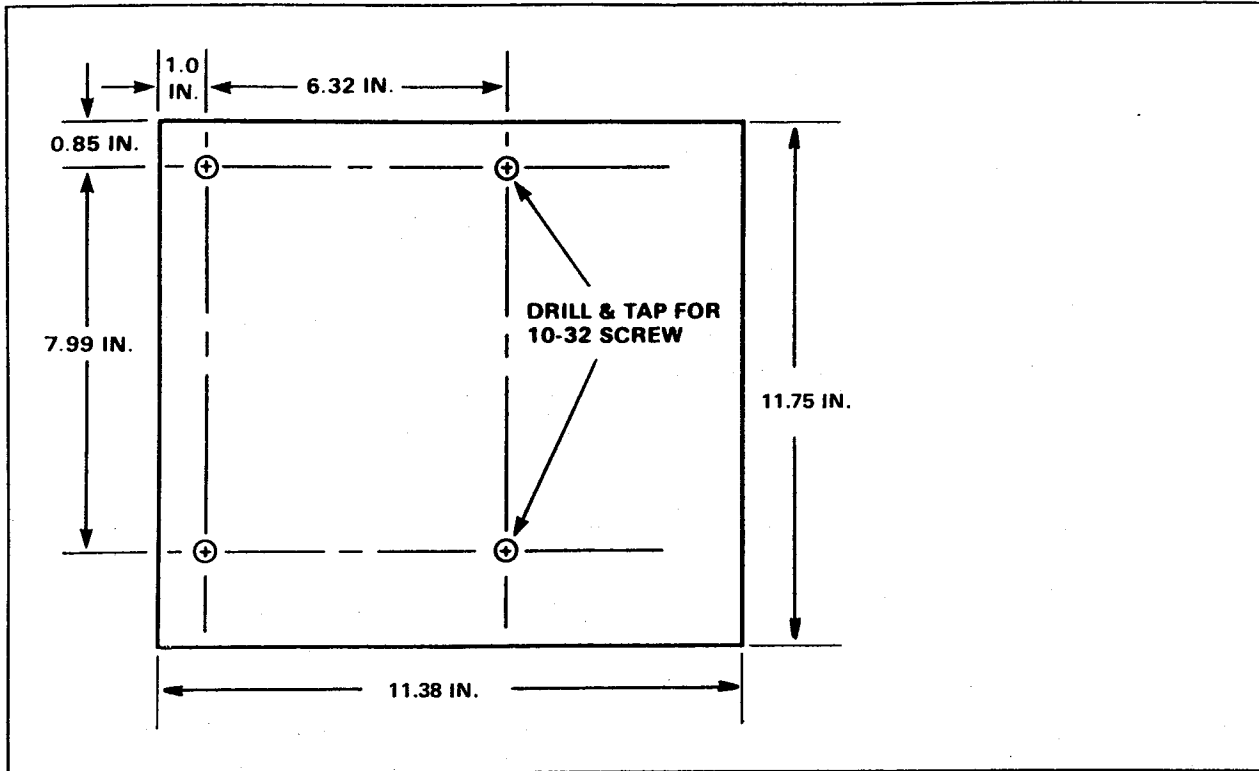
Layout Dimensions for 4-Module Rack (NLR-1004)
